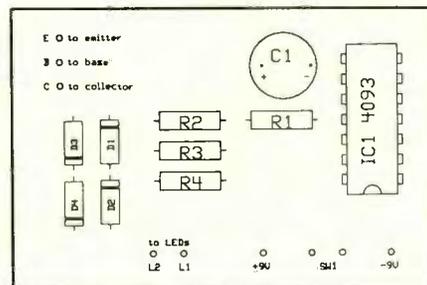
Wiring guide for pc board. Use this layout as a general guide to component placement if you build circuit on perforated board.
